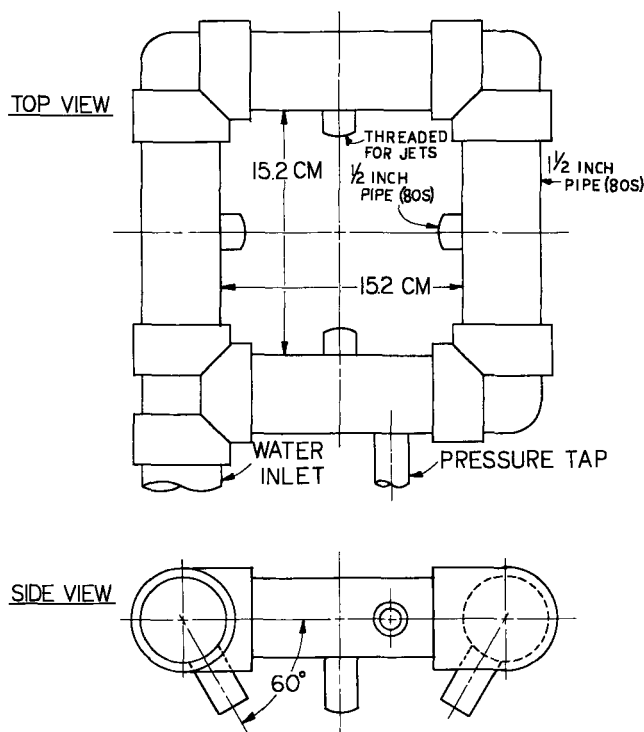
Manifold for obtaining the desired jet geometry in water-jet atomization—drawn to scale. Material is welded stainless steel.
